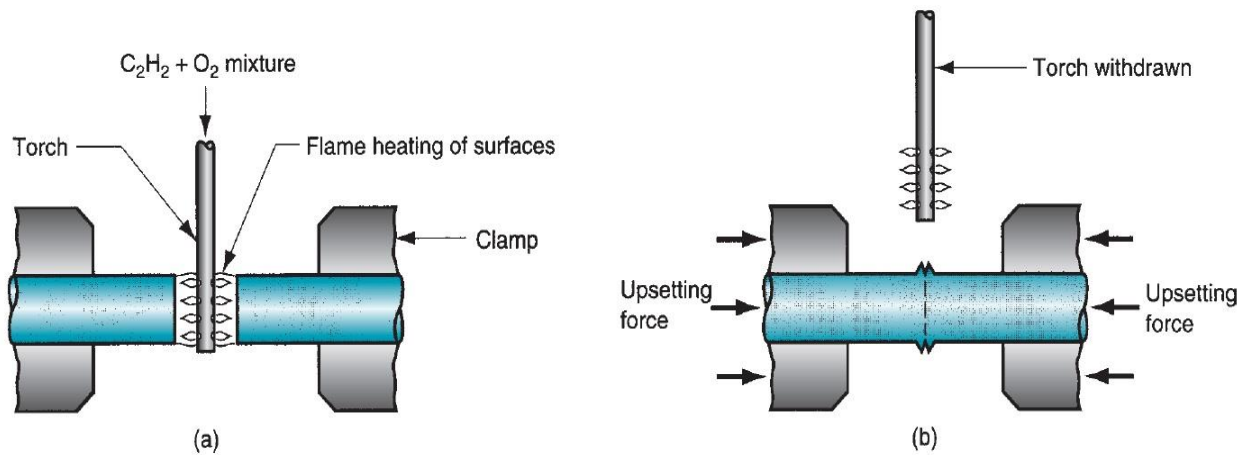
An application of pressure gas welding: (a) heating of the two parts, and (b) applying pressure to form the weld.
